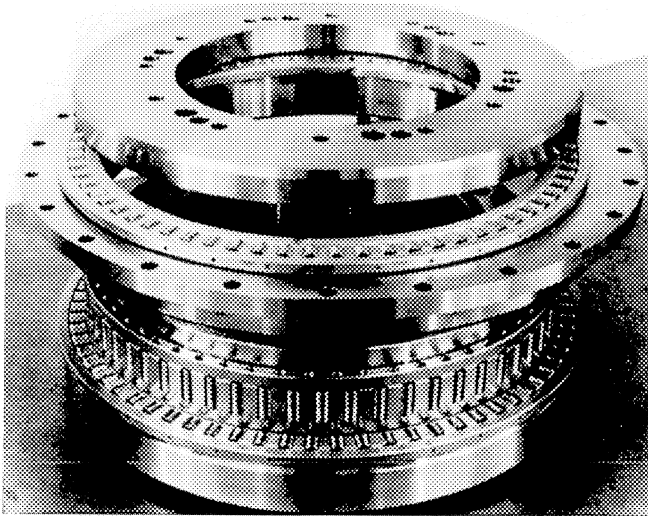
Large-Diameter Thrust Roller Bearing
